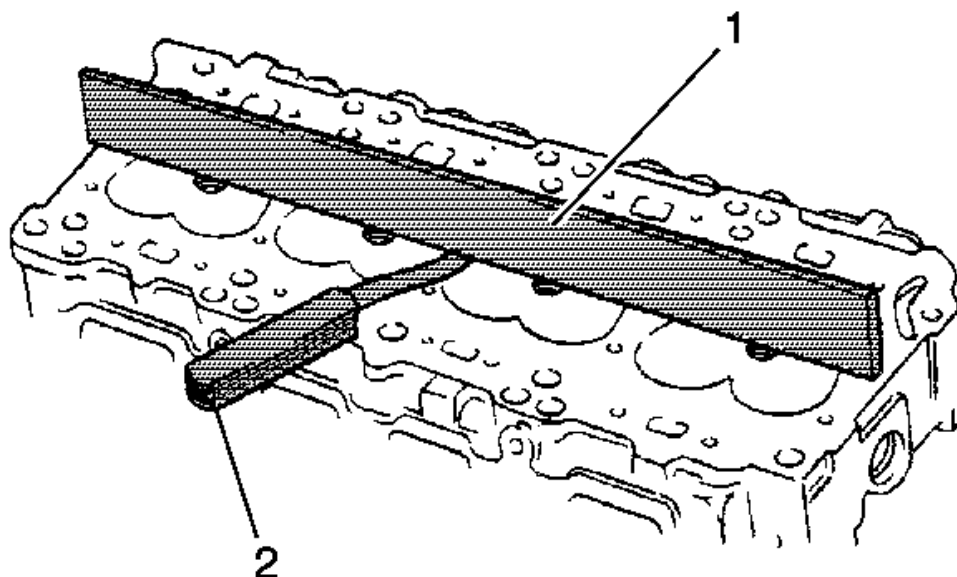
Using Straight Edge And Feeler Gage, Check Cylinder Head Deck Surface For Flatness
